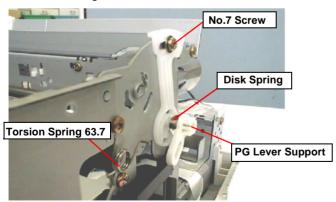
Removing the Torsion Spring 63.7 & PG Lever
